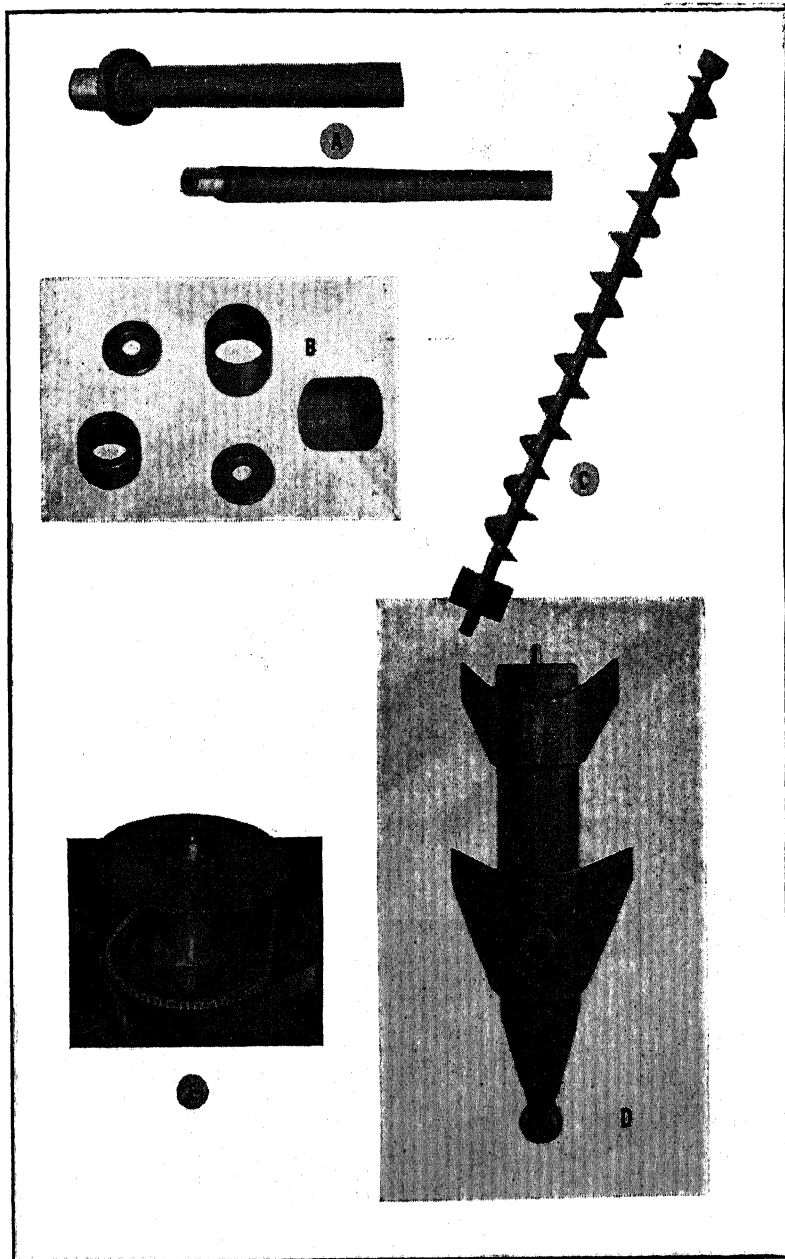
MISC. PARTS—(A) Main drive shaft for harvester. (B) Pulley for idling device. (C) Screw conveyor for harvester. (D) Front post of a road grader. (E) Chain-driven drum gauge.
